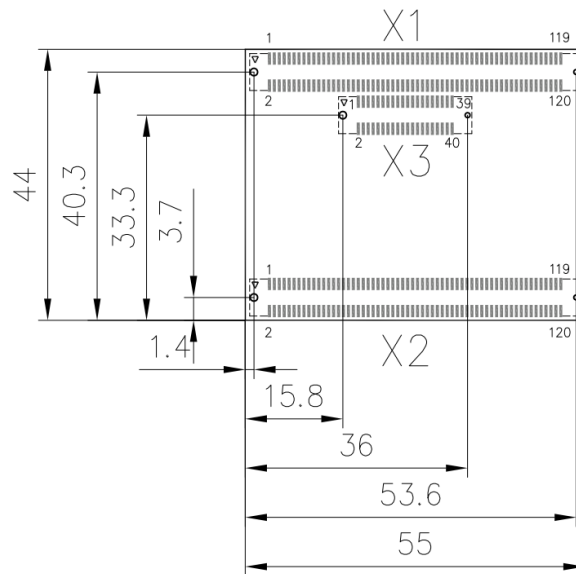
TQMLS102xA dimensions, top view through TQMLS102xA
